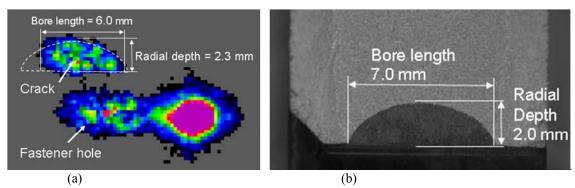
Comparison of (a) ultrasonic C-scan image and measured crack dimensions with (b) fractographic image and actual dimensifor a crack in a 12 mm thick specimen. Ultrasonic data were acquired using 15 MHz transducers with the specimen under tensile load to fully open the cracks. The crack profile from the fractographic image (b) is shown superimposed on the C-scan (a) by the broken curve.
